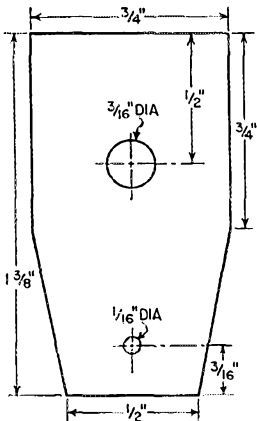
Details for making the tin plate for mounting the neutralizing capacitor.
